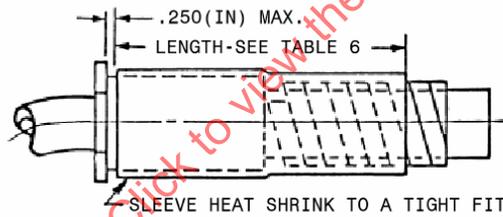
ABRASION SLEEVE ATTACHMENT /7/ /8/
